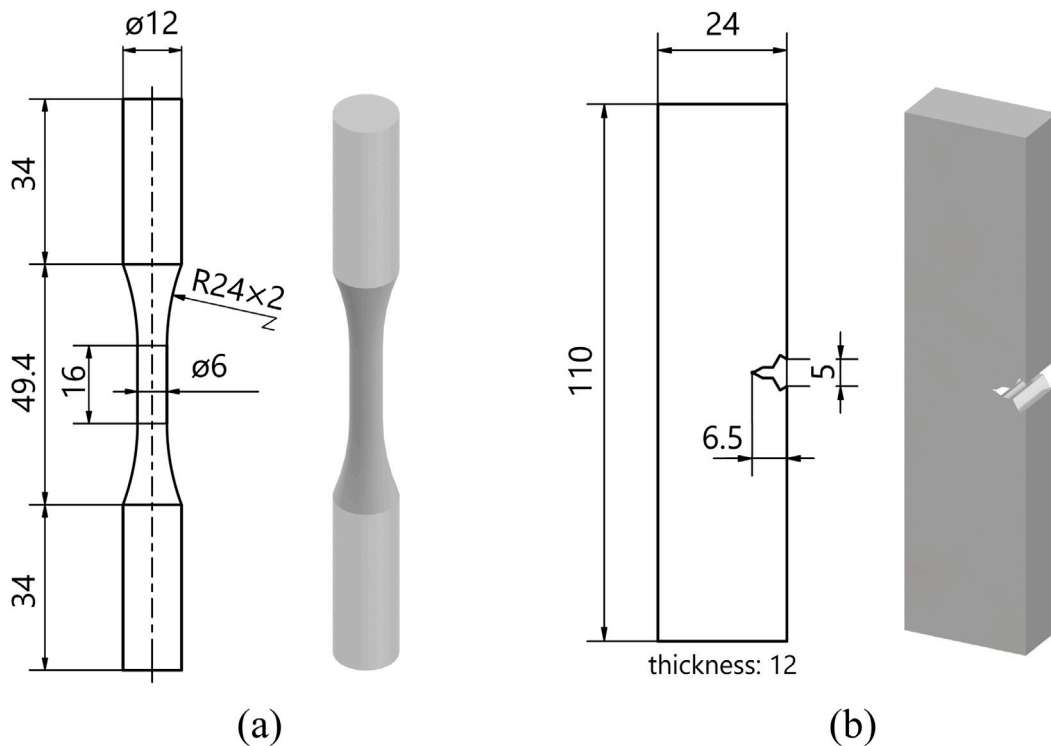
Technical drawings and 3D renderings of the Ti-6Al-4V specimens from [51,53]: (a) fatigue specimens; (b) crack propagation specimens.
